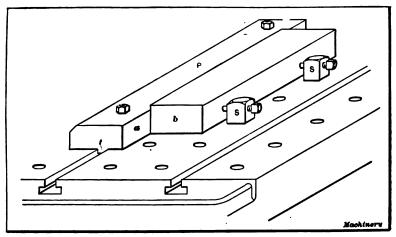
Work held between Stop-pins and Strip Bolted to Platen
